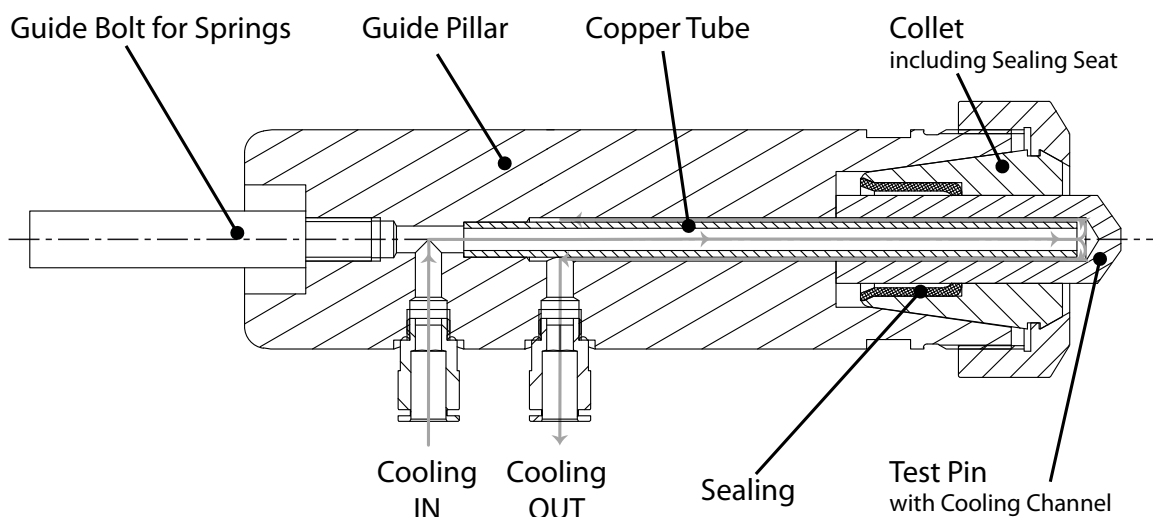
Detail drawing: Cooling - for a complete drawing see Appendix B-B6
